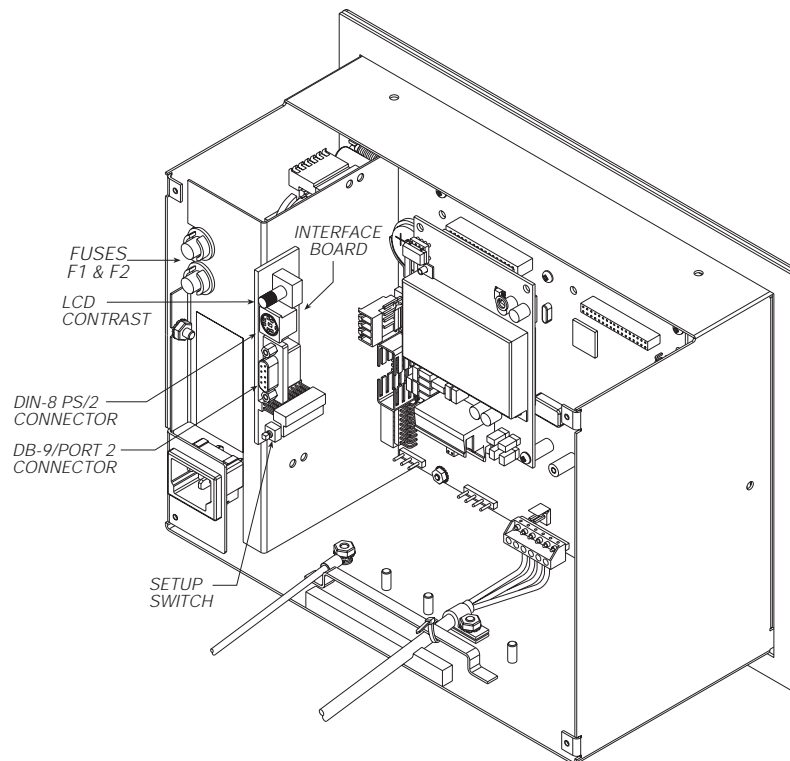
Panel Mount Enclosure, Interface Board and Fuse Locations
